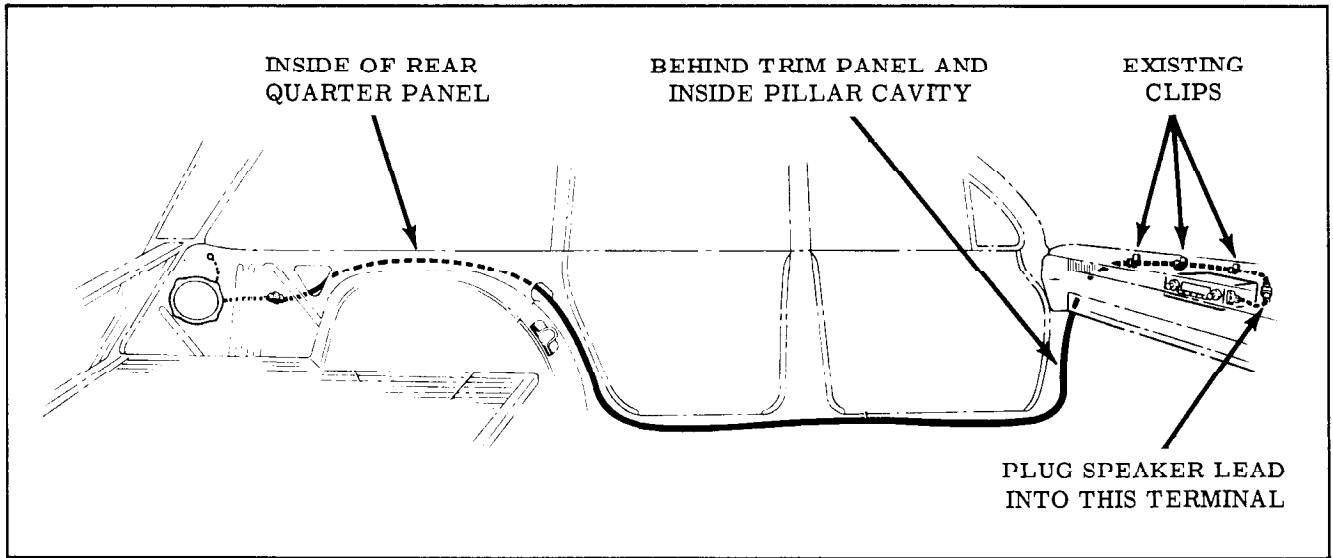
Rear Seat Speaker Lead (Fiestas)
